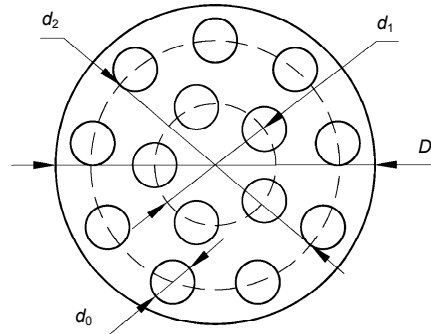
Layout and dimensions of the holes on the perforated plate (Huang *et al.*, 2013)
